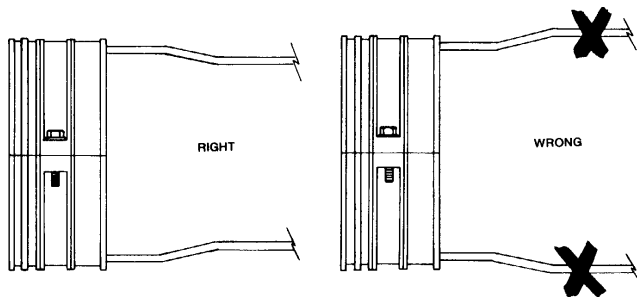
CORRECT POSITION OF TORQUE BAR
